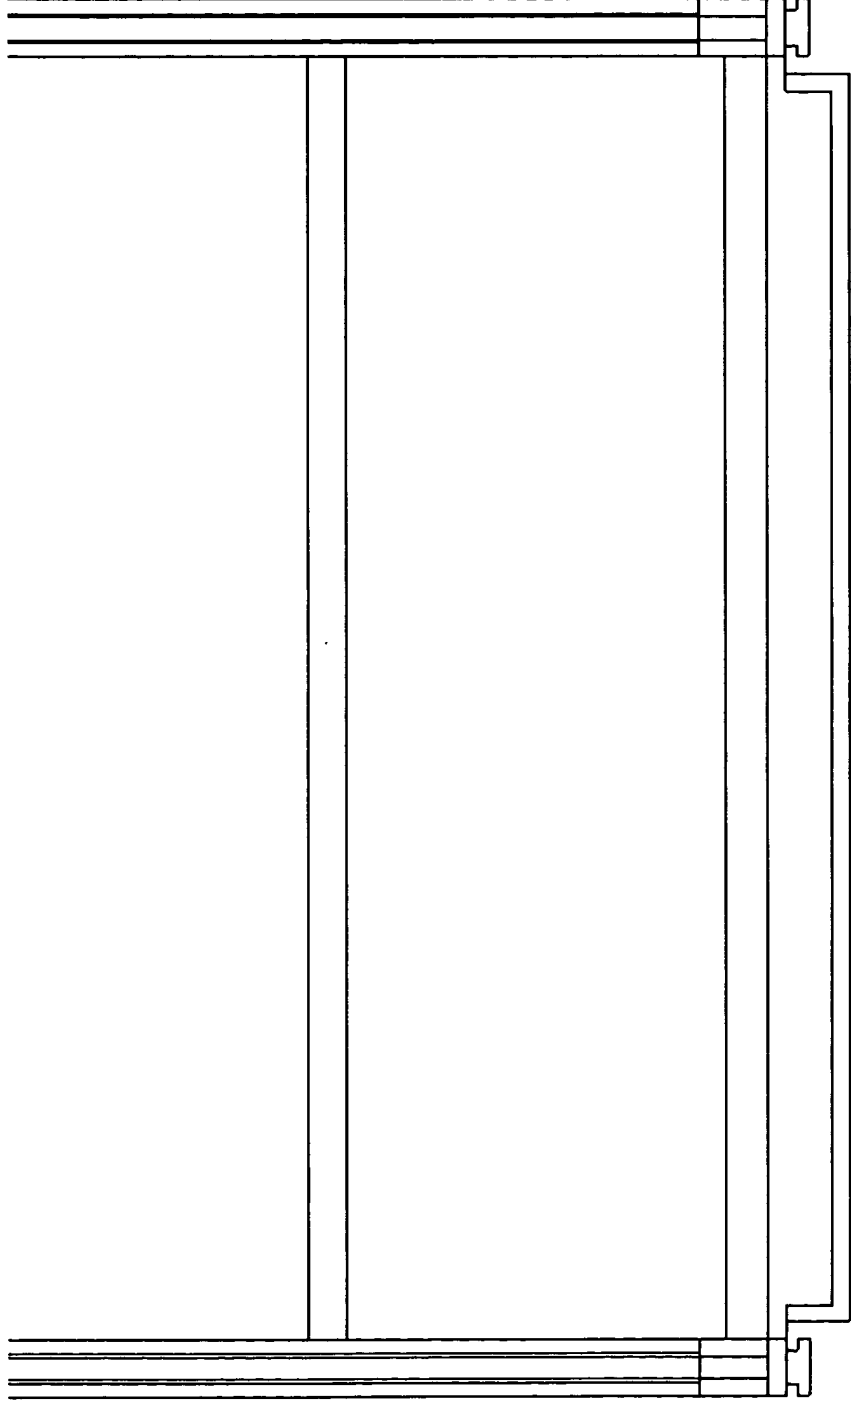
B: Top view of the right end of a floor frame (40 foot high cube collapsible cargo container)
